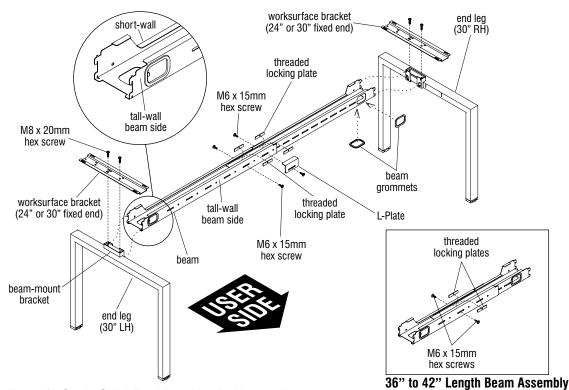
Single-Sided Fixed Benching End Legs & Beams
